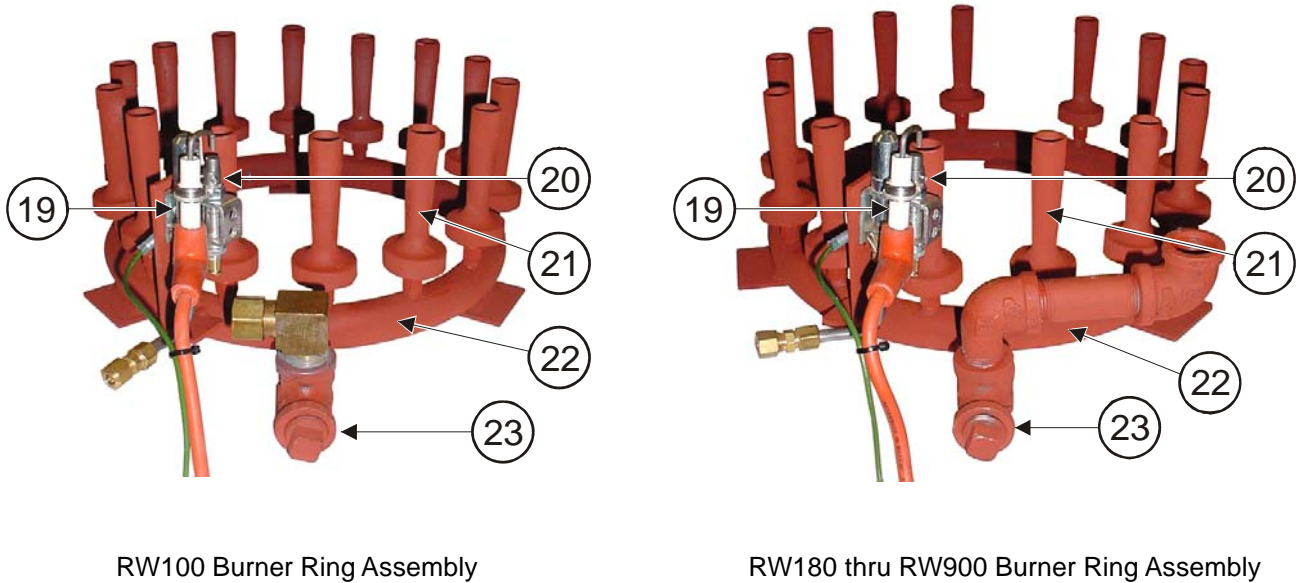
Detail of RW Series Burner Ring Assembly and Components
